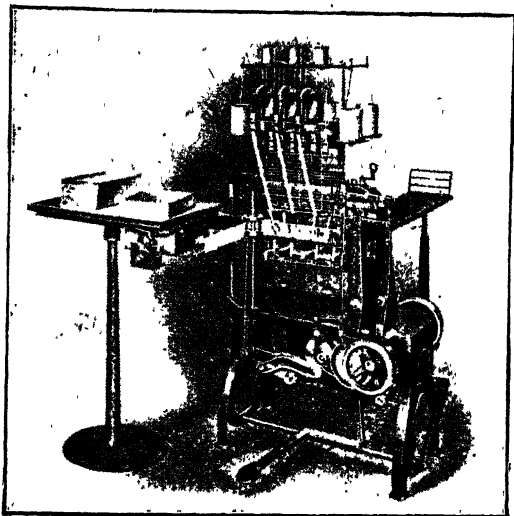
NO. 3 "SMYTH" BOOK-SEWING MACHINE.
